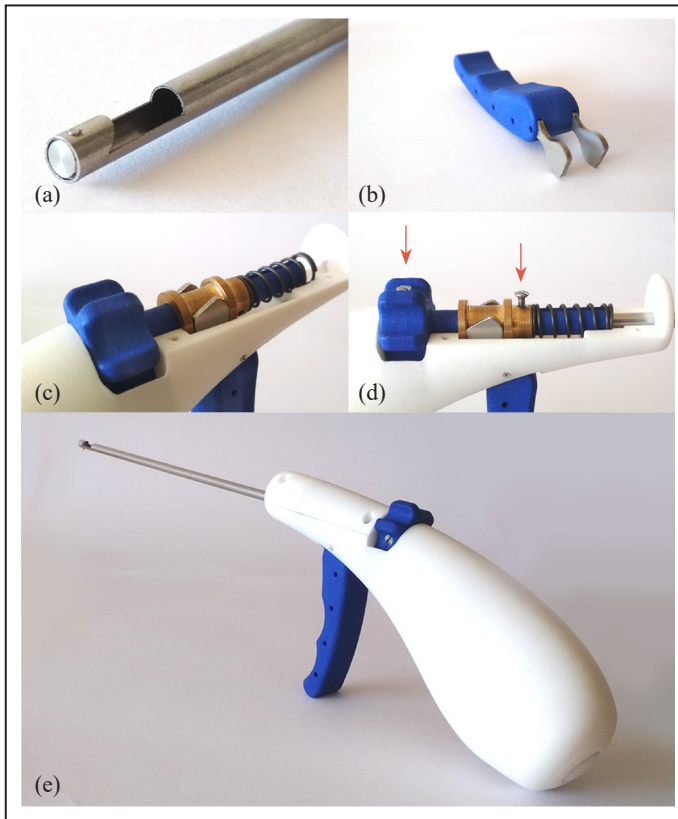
Assembly steps of the prototype. (a) The distal section. (b) The lever and translation-rotation pins. (c) The translation-rotation mechanism placed in the handle. (d) The shafts connected to the translation-rotation mechanism by screws. (e) The completely assembled prototype.
